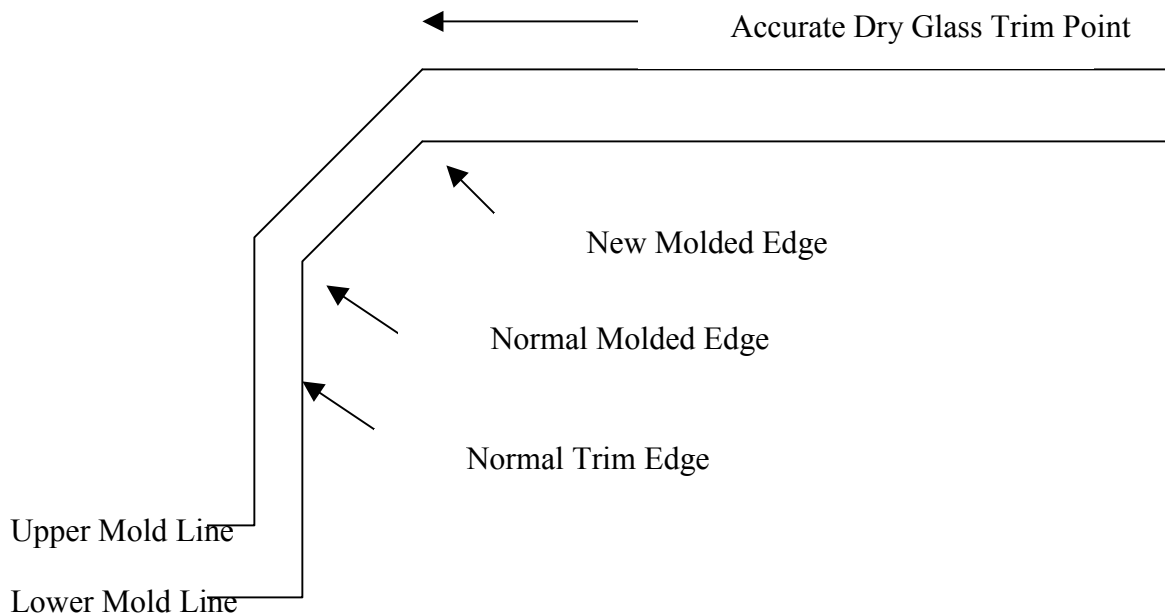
Extend the part so that there is a 1” long bevel at 45 deg. This replaces the open mold flange laminate with a reinforced tab that assists in de-molding when wedges are used.
